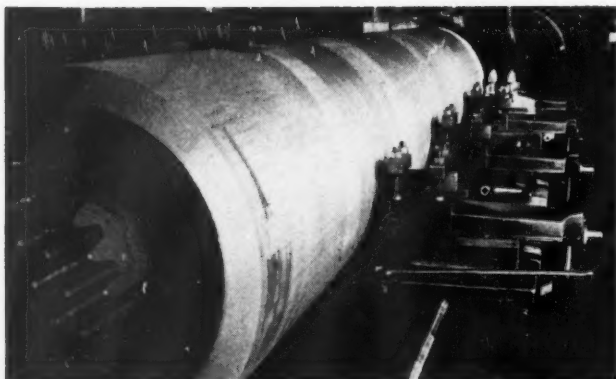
Illustration showing 14-ton cast iron drier roll 60 inches in diameter x 226 inches long being rough turned in one pass with four 1-inch diameter heavy duty Kendex insert tools
